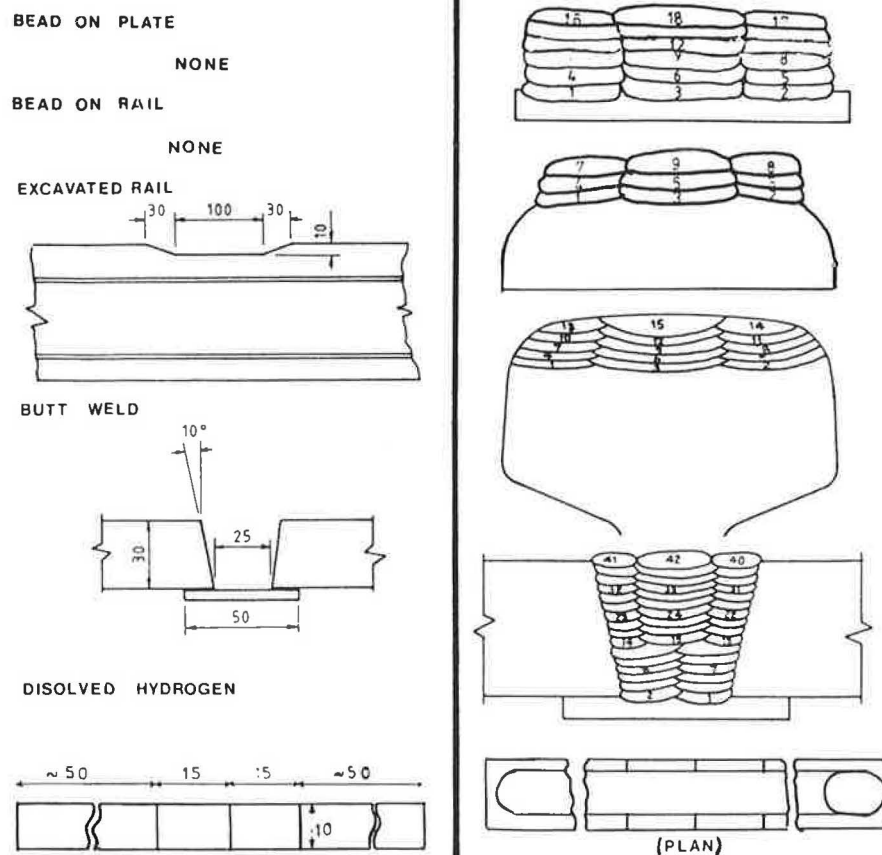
Preparation (*left*) and welding sequence (*right*) for test samples.
